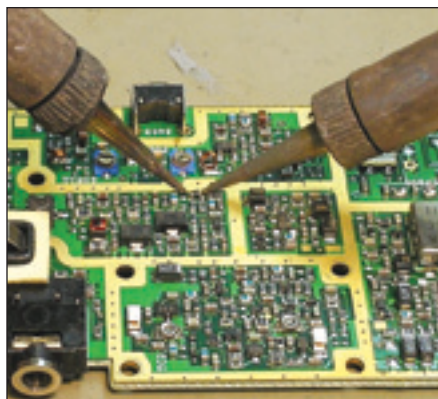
Stephen Wimmer, WU0F uses a pair of 25 W soldering irons to heat both ends of a surface mount component at the same time to remove the component from the circuit board.
